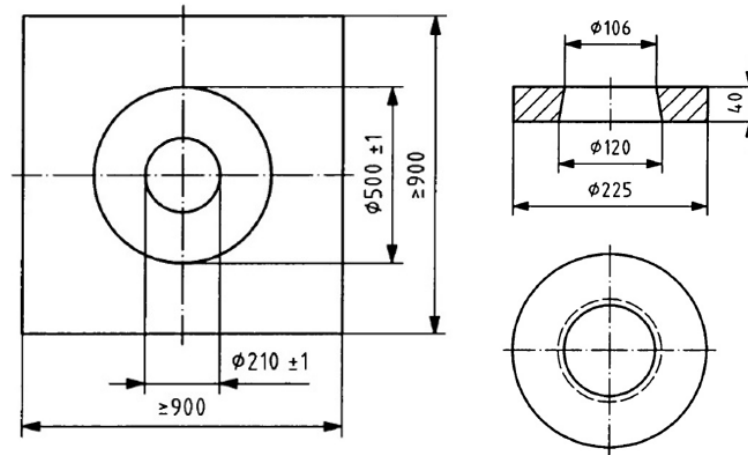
Base plate and slump cone dimension (mm) [58].
